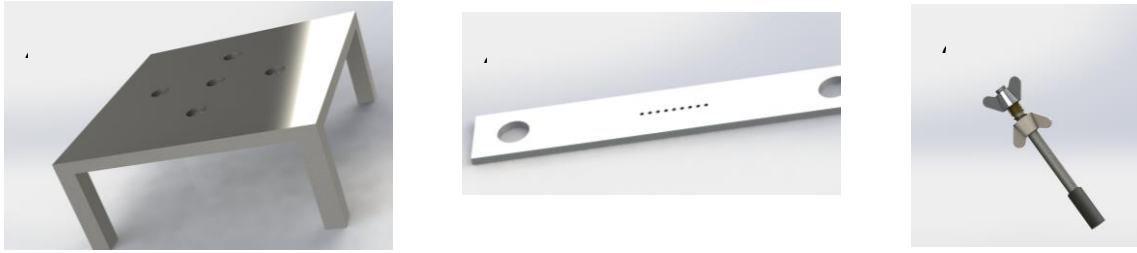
Customized parts for the measurement system. (a) setup for the supporting base; (b) clamping plates for the thermocouples and (c) for the supportive rods to hold the heaters.
